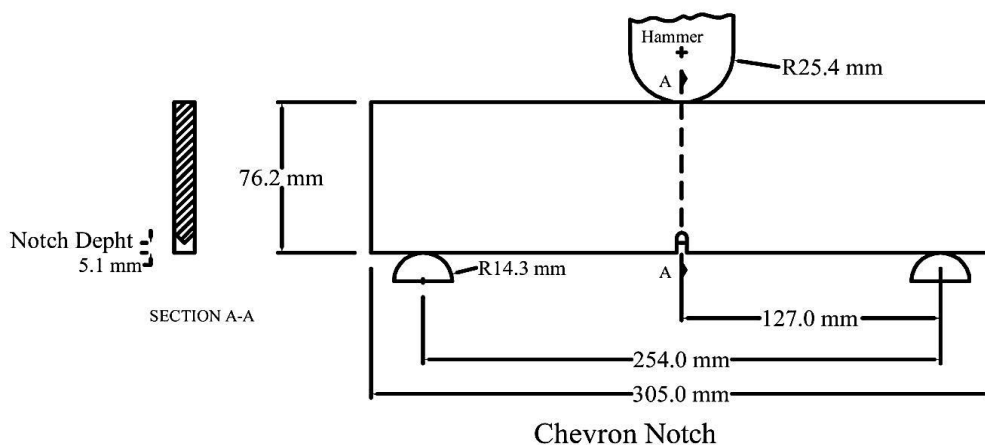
Dimensions of the DWTT specimen with Chevron notch, supports and hammer [13]
